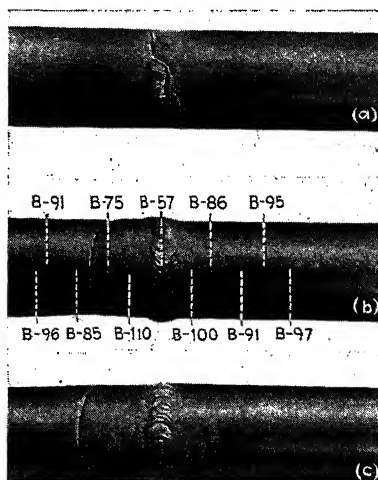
Performance of oxyacetylene welded tubes (S. A. E. 4130) under tensile loading. (a) Failure due to misalignment; (b) and (c) Rockwell hardness variation in oxyacetylene welded tubes and location of failure.
